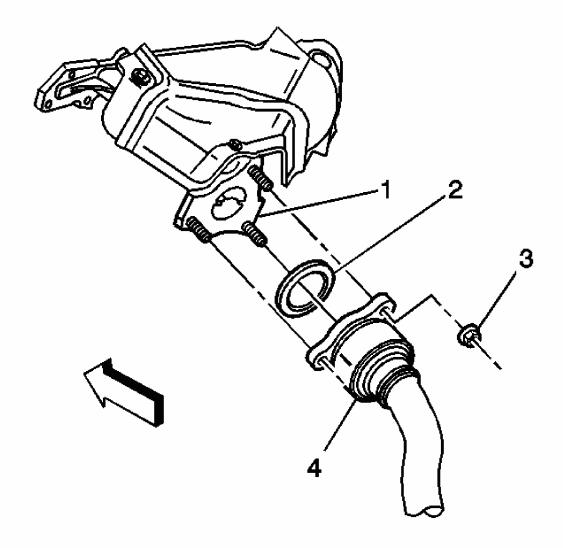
Locating Exhaust Manifold To Flex Decoupler Nuts Courtesy of GENERAL MOTORS CORP.
